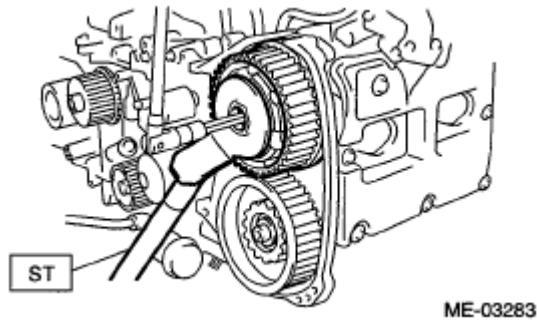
Removing/Installing Cam Sprocket Using Cam Sprocket Wrench
